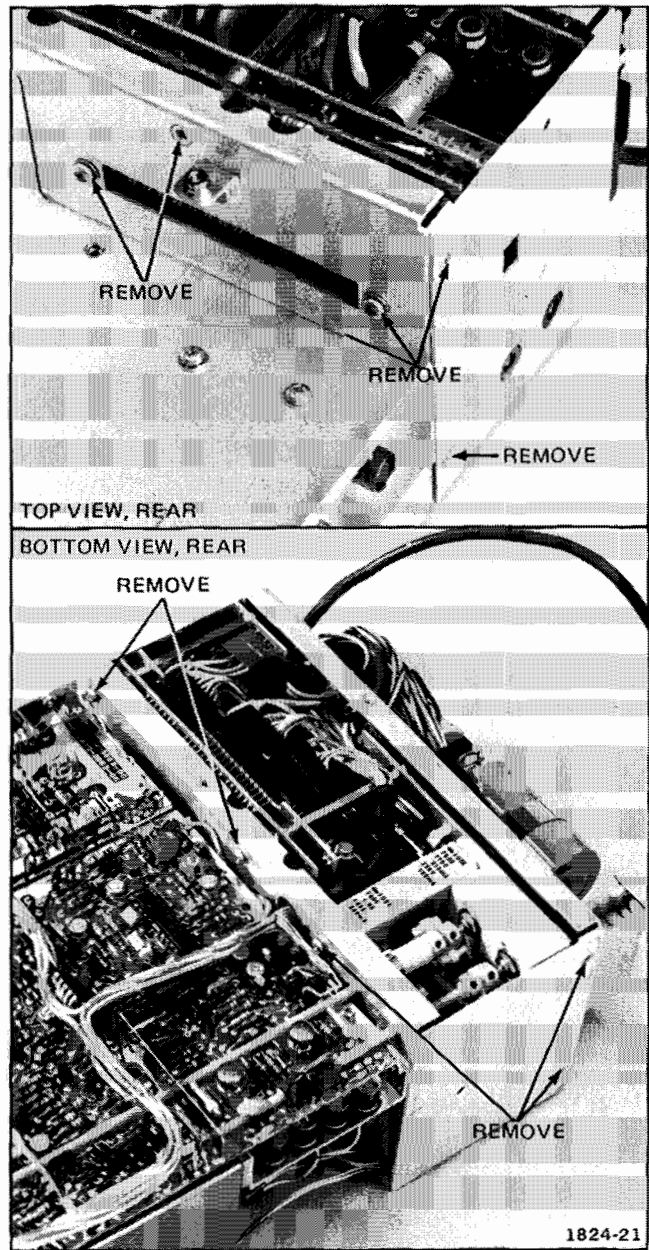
Locations of screws holding power supply section to main chassis.
